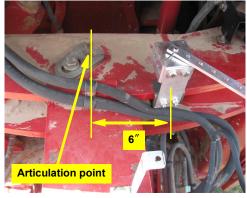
ii: Brackets location (see step 2d for WAS assembly installation)
